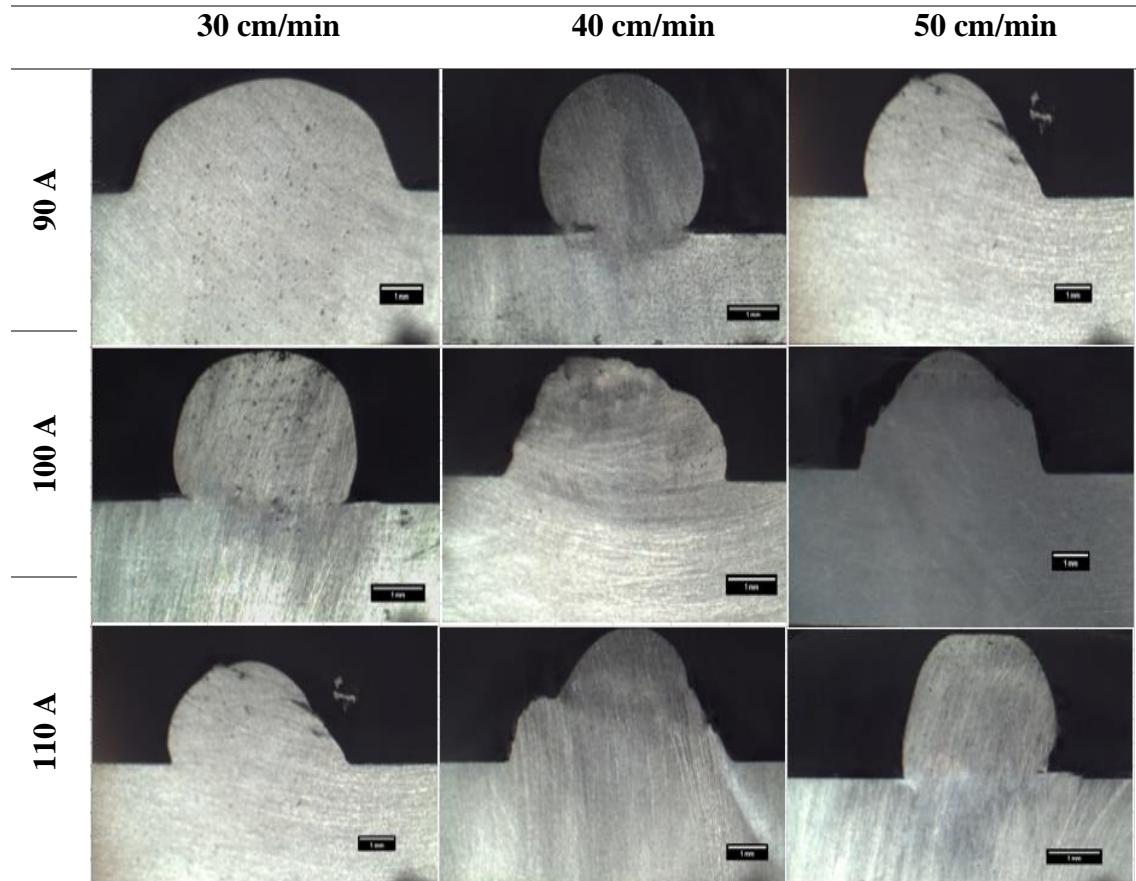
Macro-images of weld beads fabricated using flux
